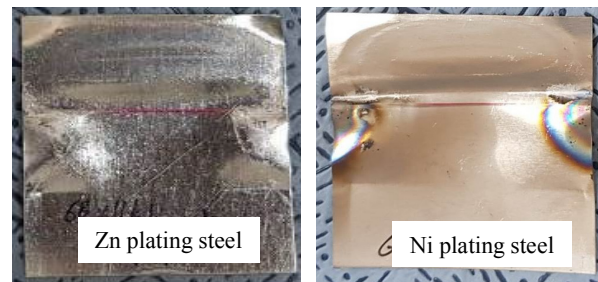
Specimens after electromagnetic pulse welding process under 17kJ heat input
